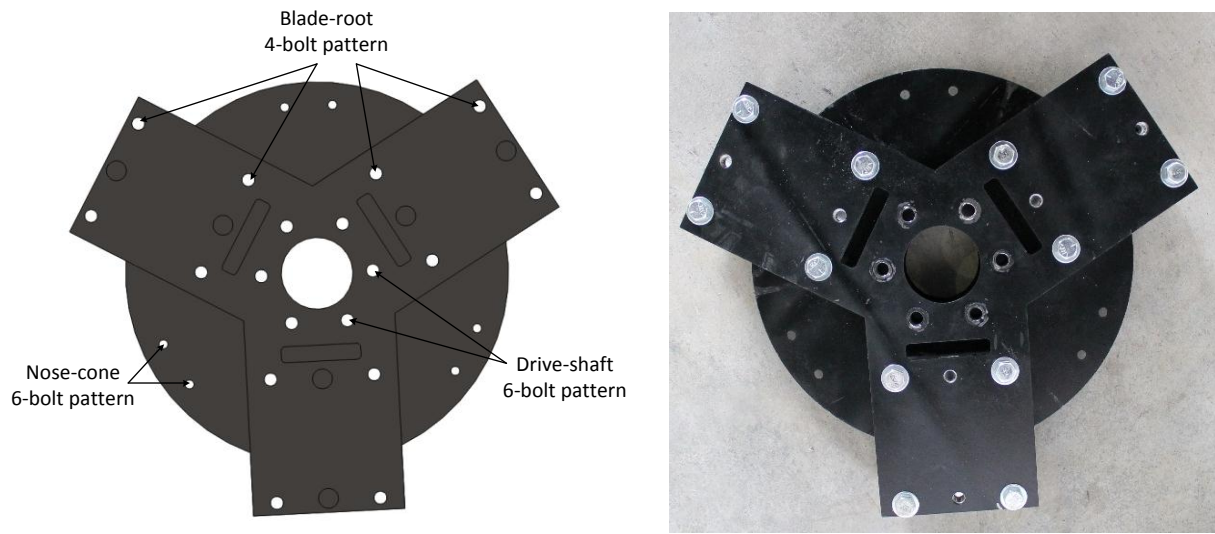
Front view 3D model and image of Hub assembly showing bolt patterns.
